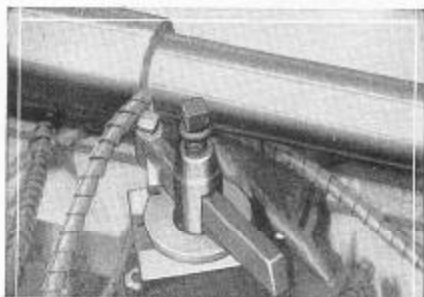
Reducing the Diameter of a Steel Shaft  $\frac{1}{4}$  in. in one cut
